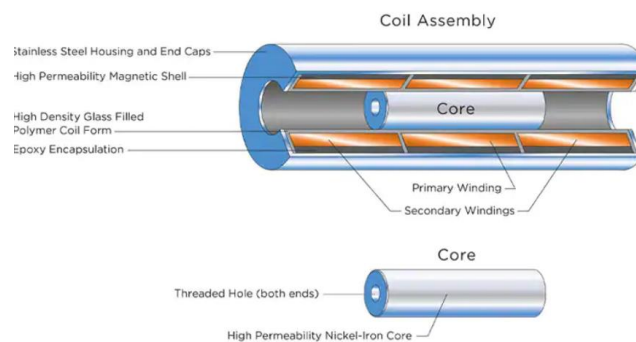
DETAIL STRUCTURE OF LVDE [3]
